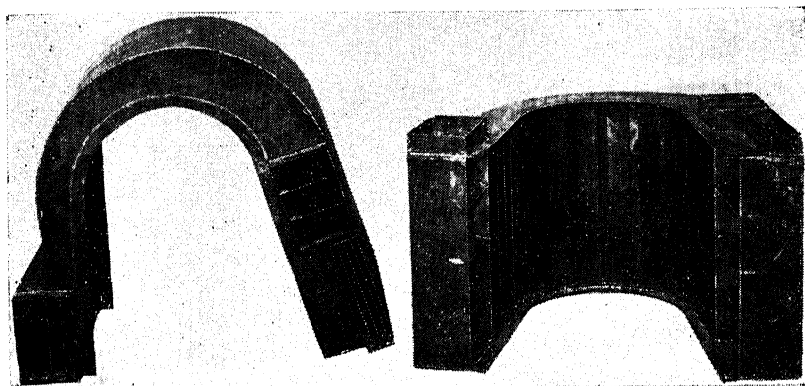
Intricate air ducts for special type of printing machine fabricated by arc welding from 18-gauge steel.
